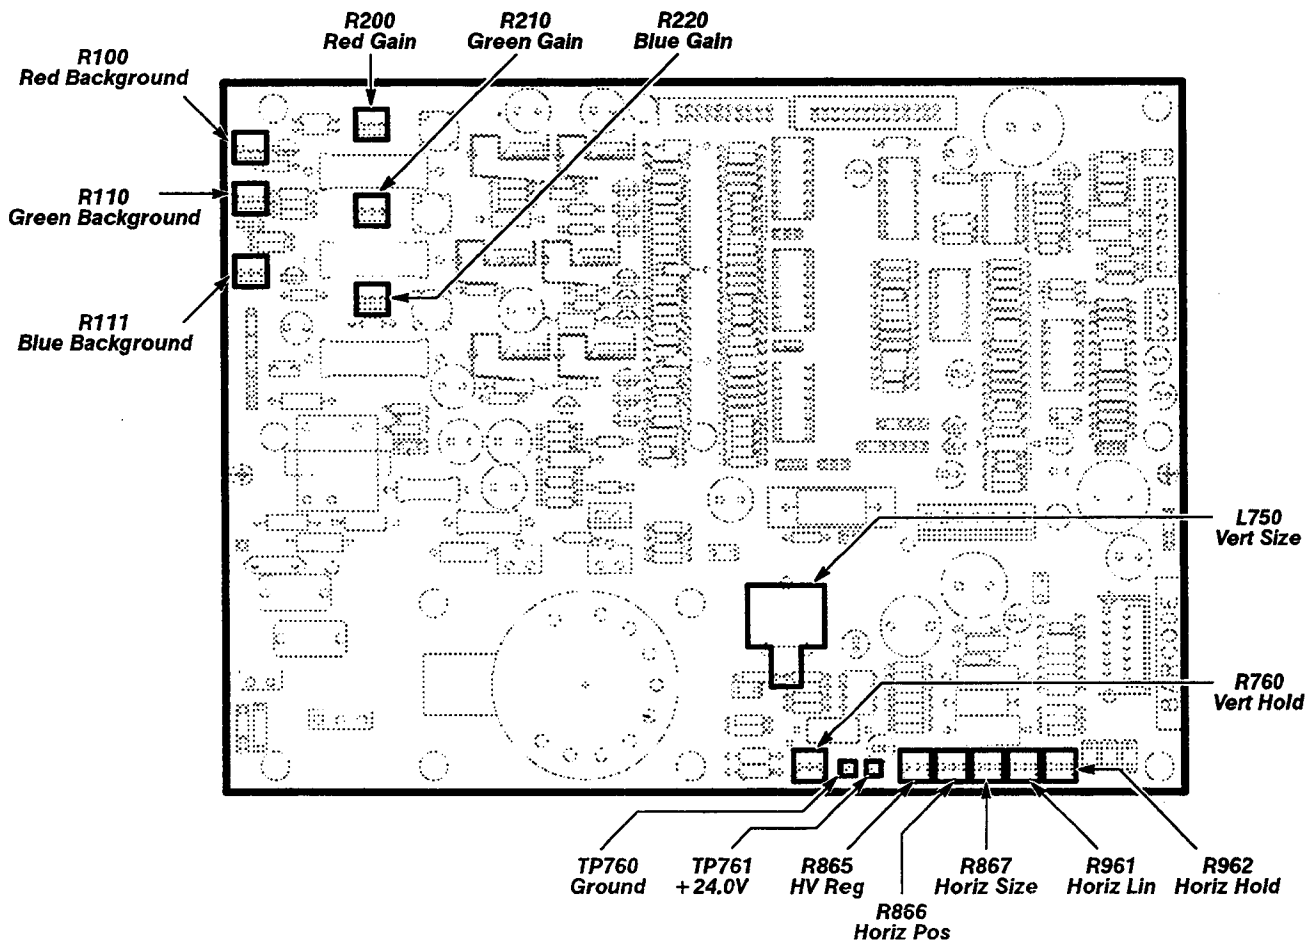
A24 CRT Driver Board Test Point and Adjustment Locations
